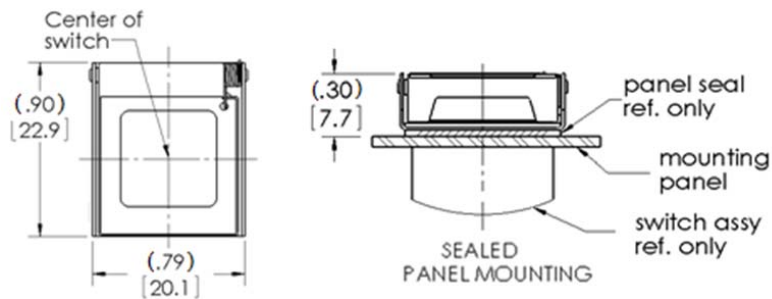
Clear cover guard (spring loaded PBG), PN 15089-TAB
